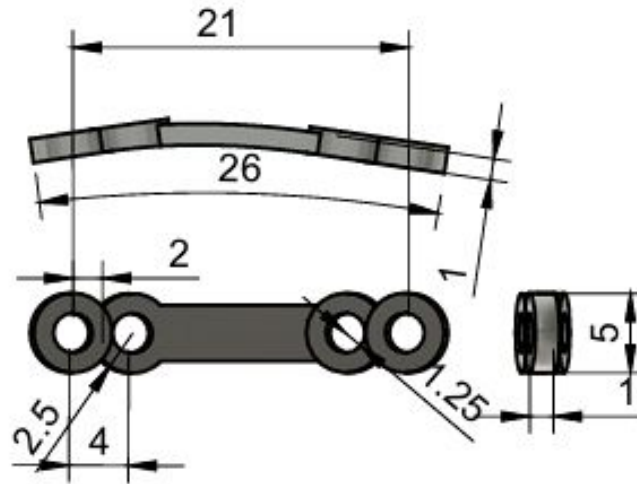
Different views of curved shaped fixture plate (all dimensions in mm)
